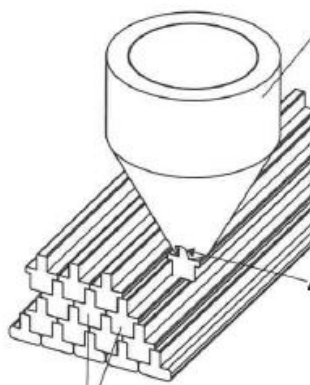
Alternative design: new nozzle geometry with anchor system for conventional printing or alternating layers
